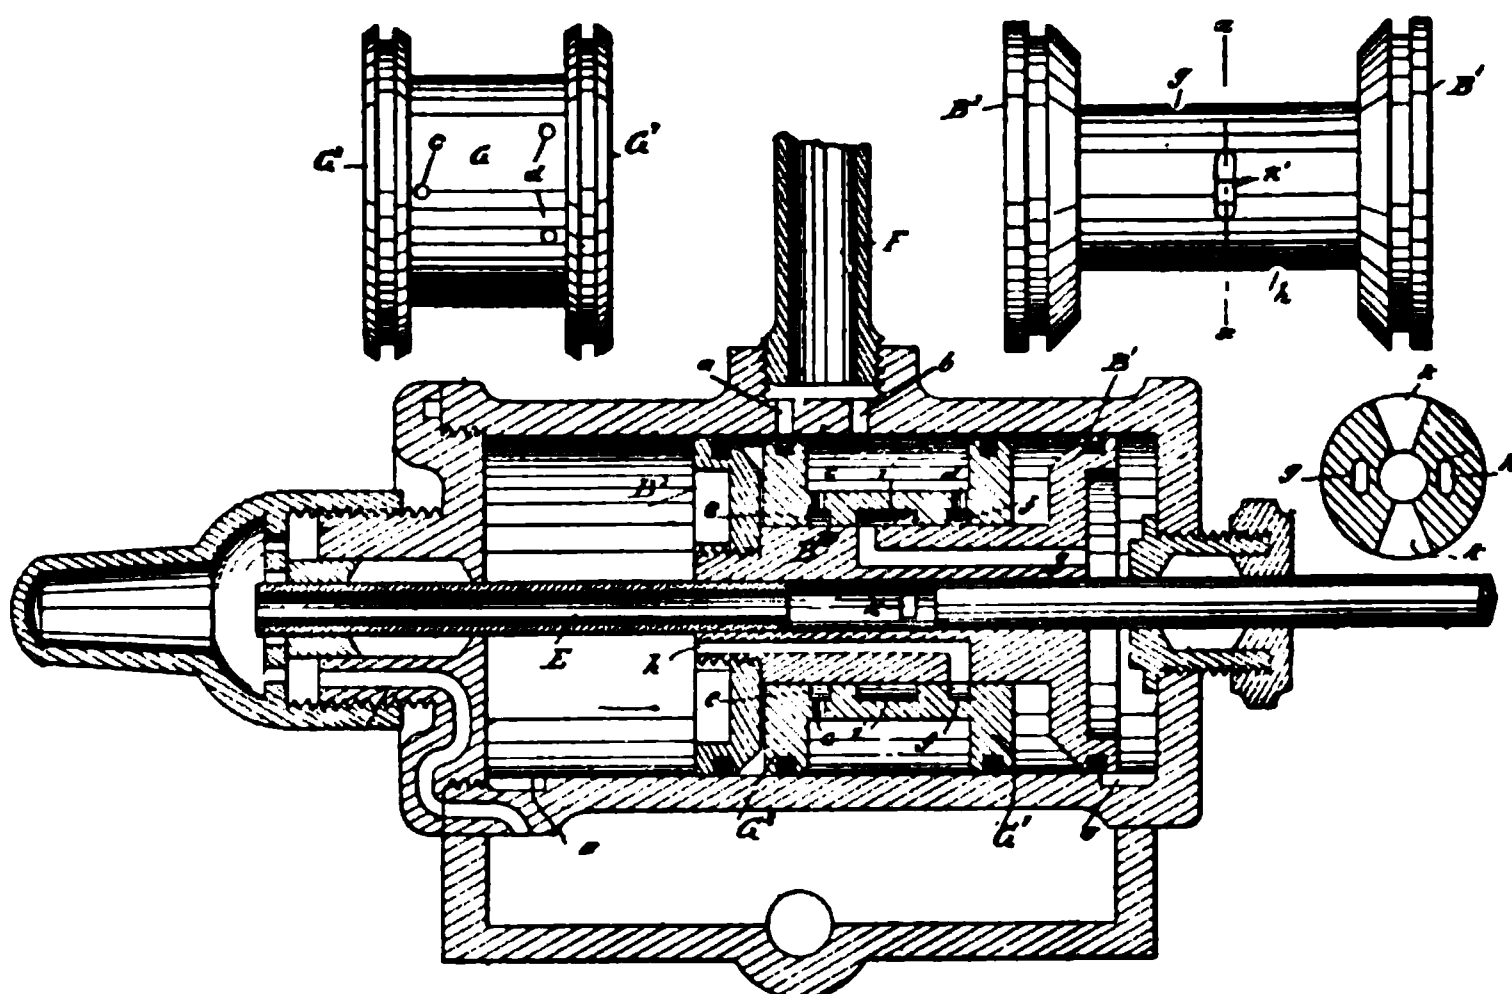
Section showing the Valve Motion and Mechanism of the Moore Steam Pump used on some Steam Carriages.
